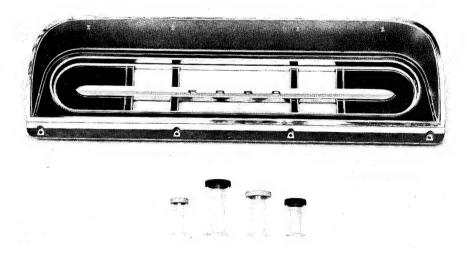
B: Variable Sized Parts Produced by Hot Runner Moulds
